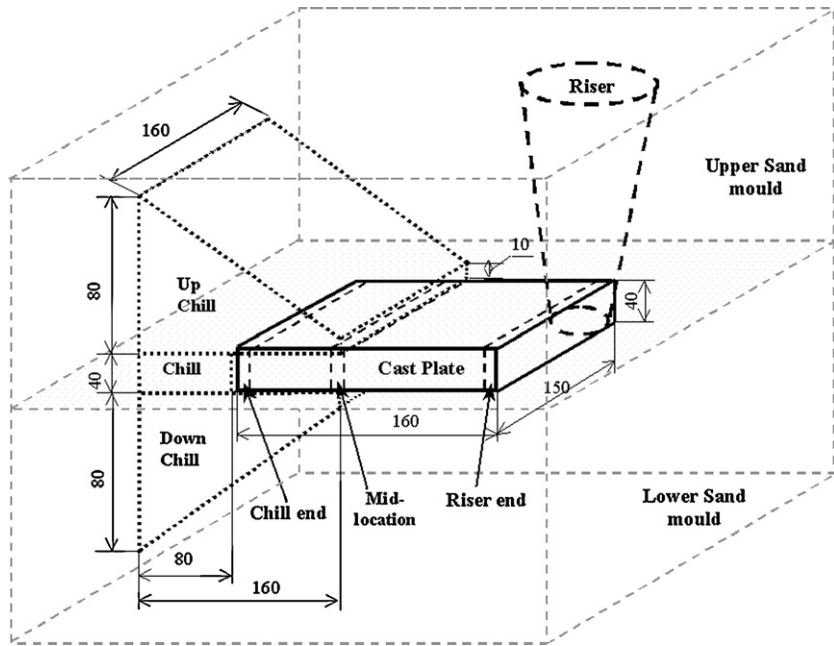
Sand mould, mould cavity and the chill used in the present experiment.
